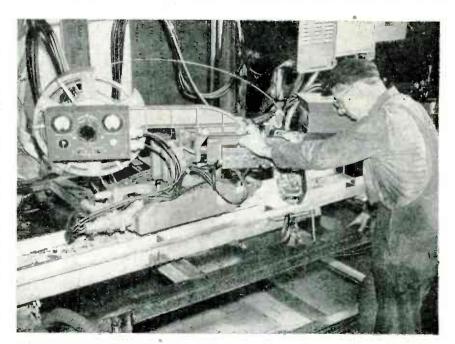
Seam welder controls are mounted on carriage and connected by cable with electronic equipment in box over operator's head
